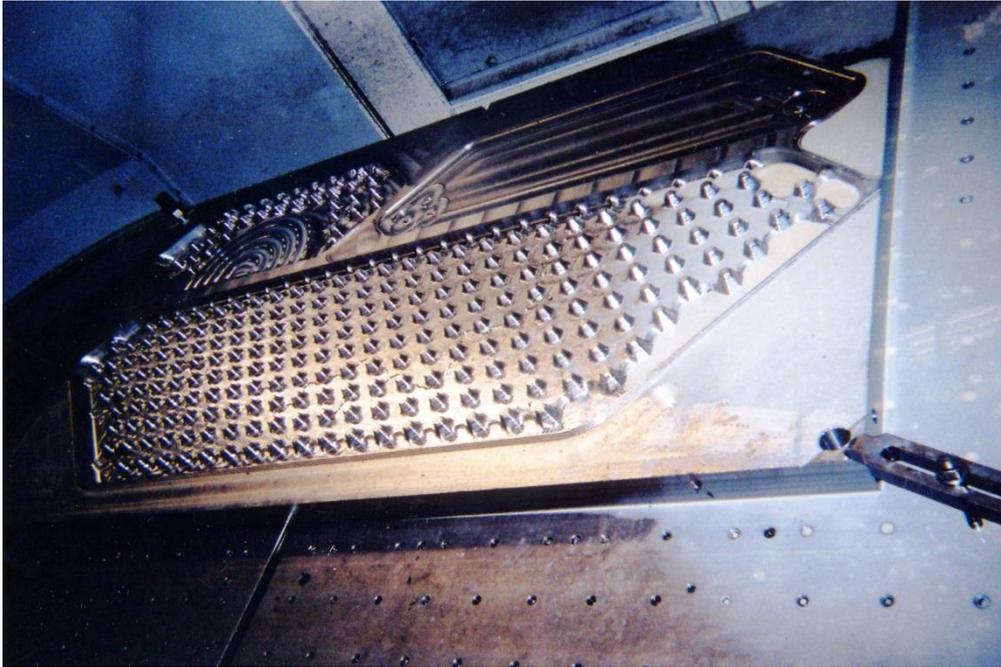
The almost completed side of the mould. The right side is flooded with white cooling fluid from the milling process.
